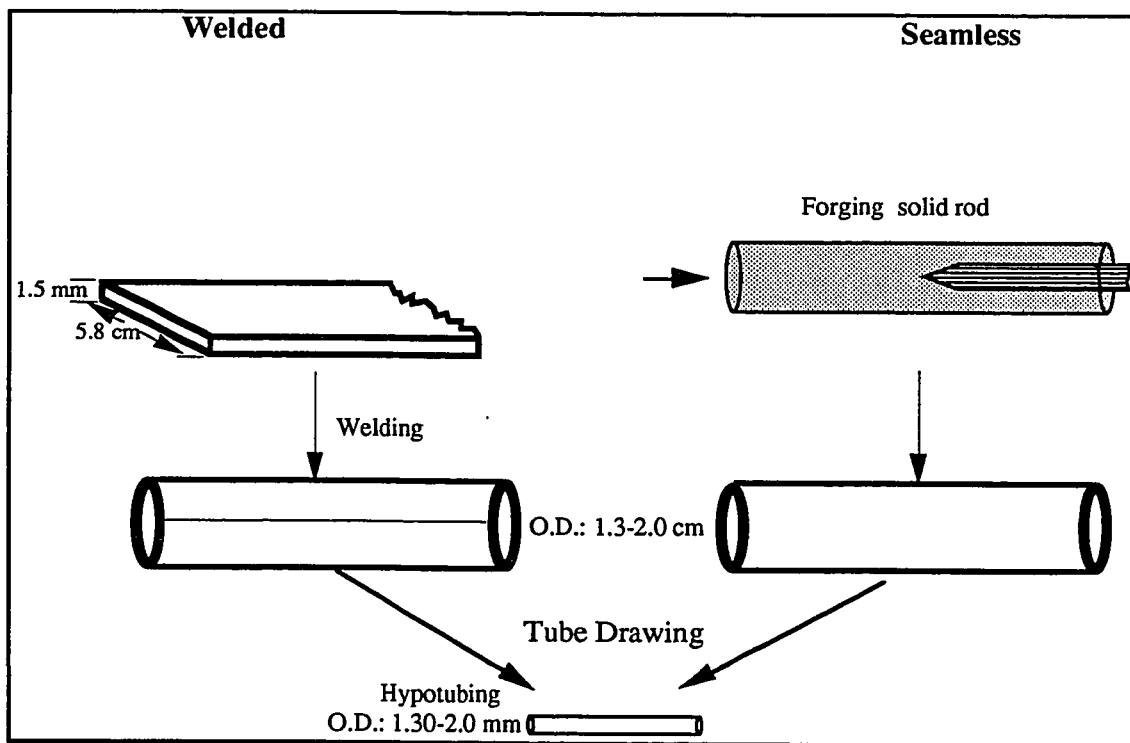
Schematic diagram of manufacturing seamless and welded hypotubing
